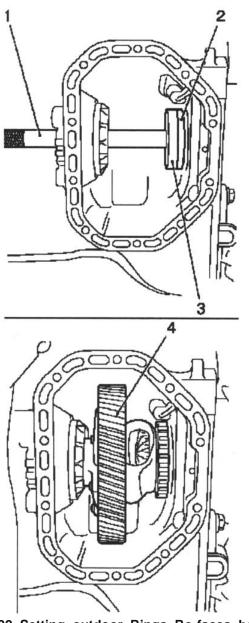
Setting outdoor Rings Ro-faces bearing: 1,3 - a special tool, 2 - roller bearing; 4 - differential
